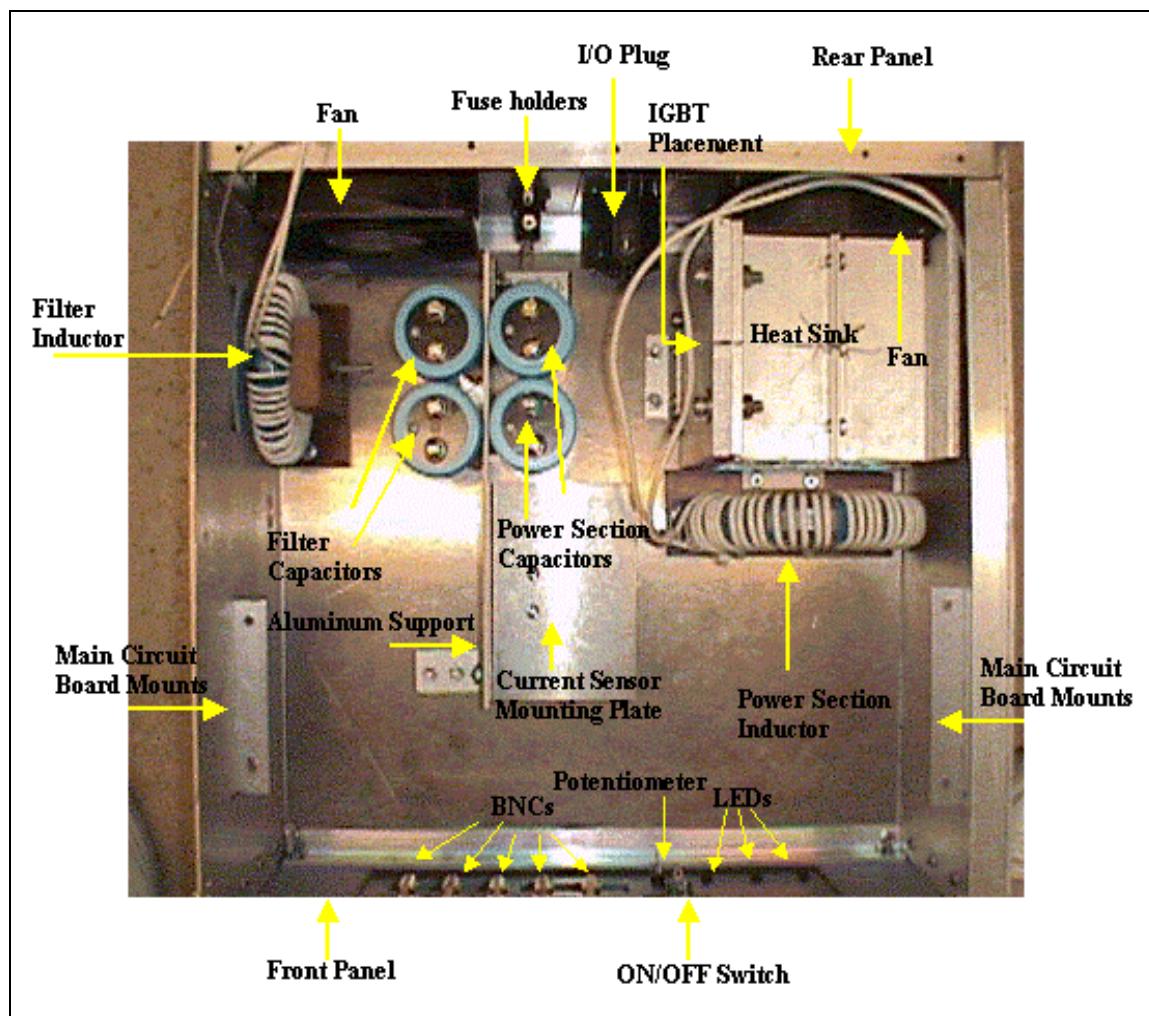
, Heat Sink, Input Filter and Power Section Placement.
